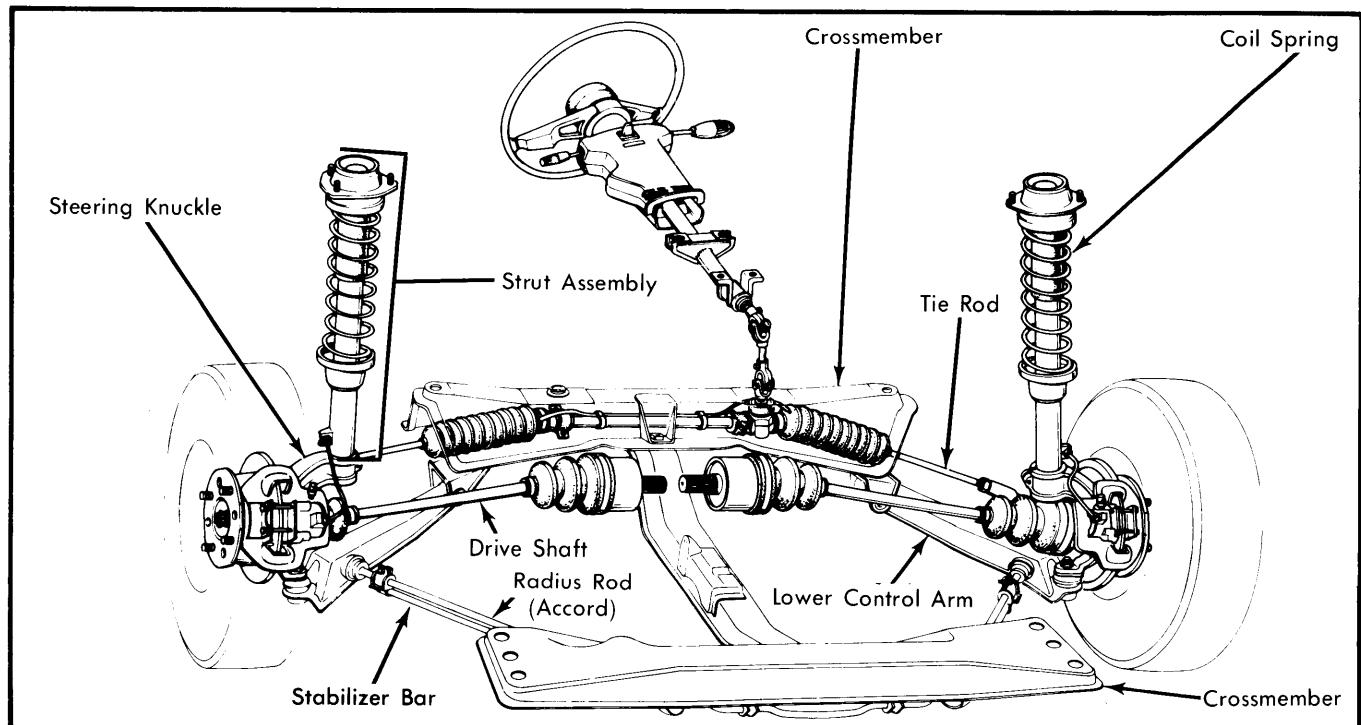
Assembled View of Honda Front Suspension Showing Component Relationships
